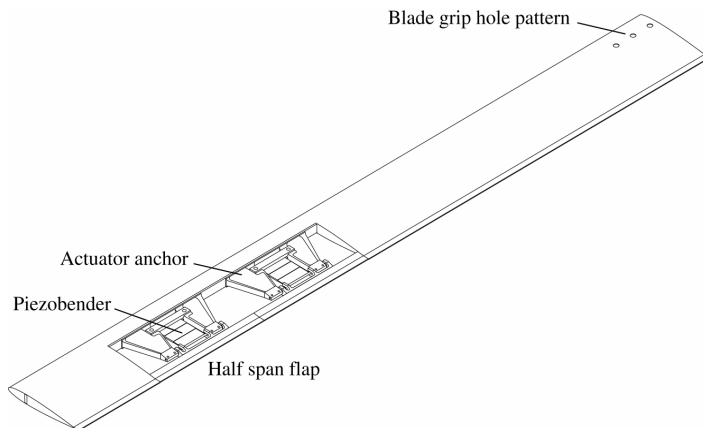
Rotor blade with dual trailing-edge flap assemblies
